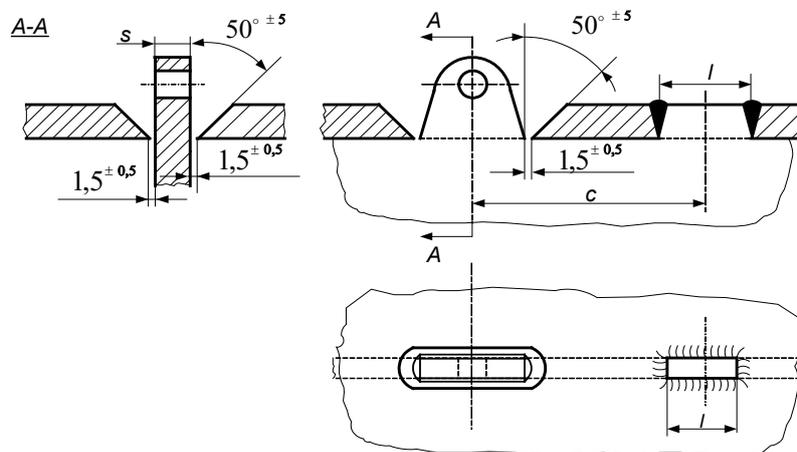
Pin slot weld
